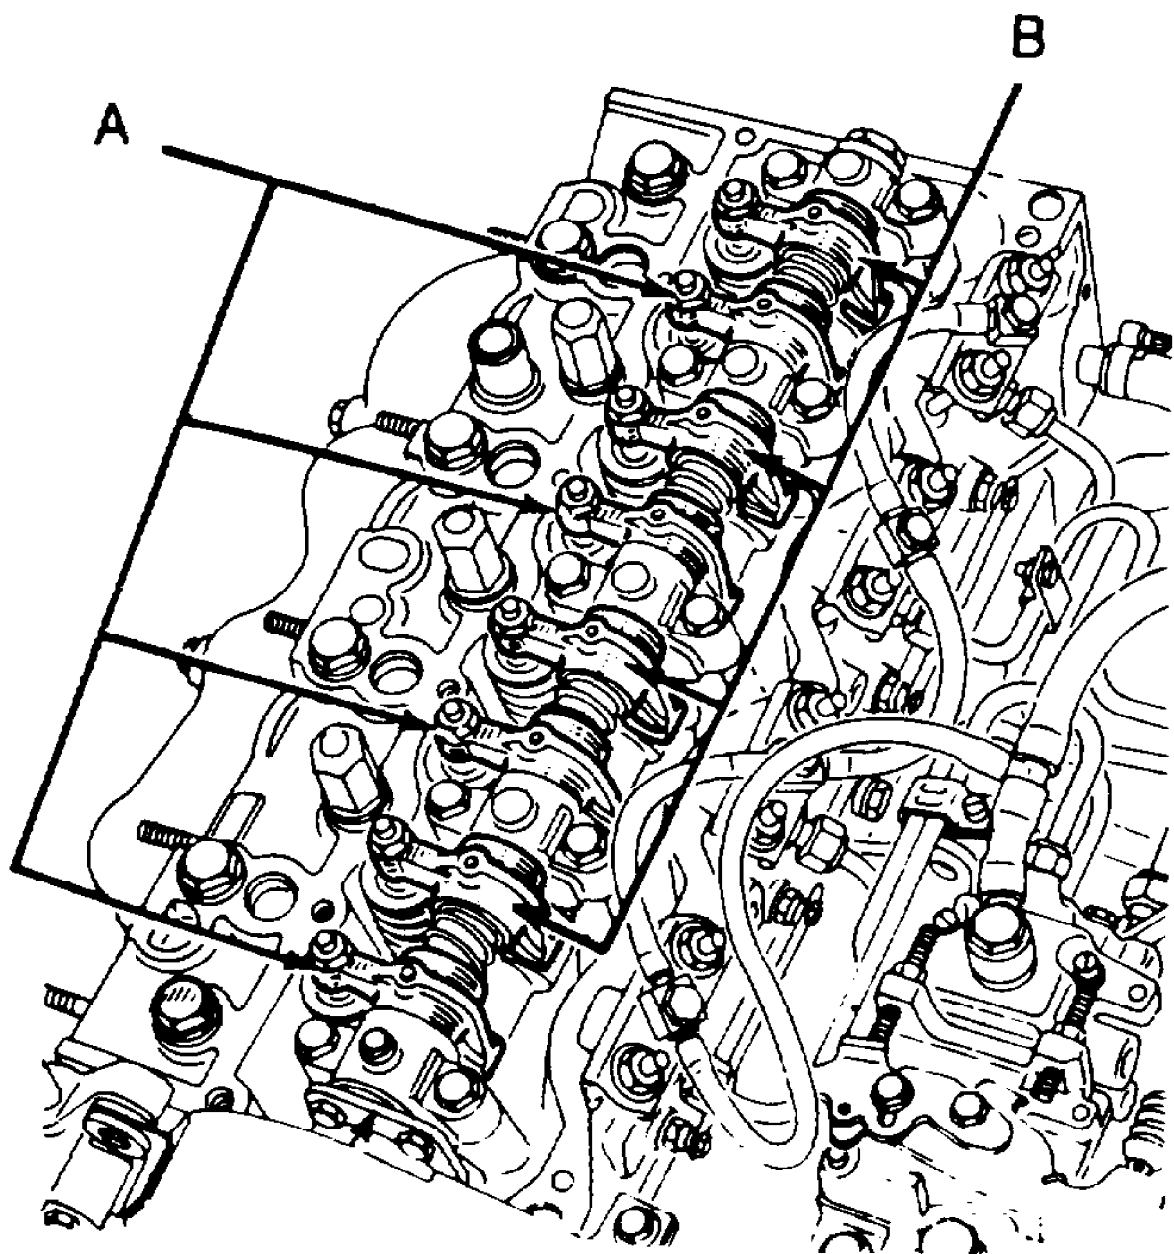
Rocker Arm Shaft Assembly (Oil Filter Location)
